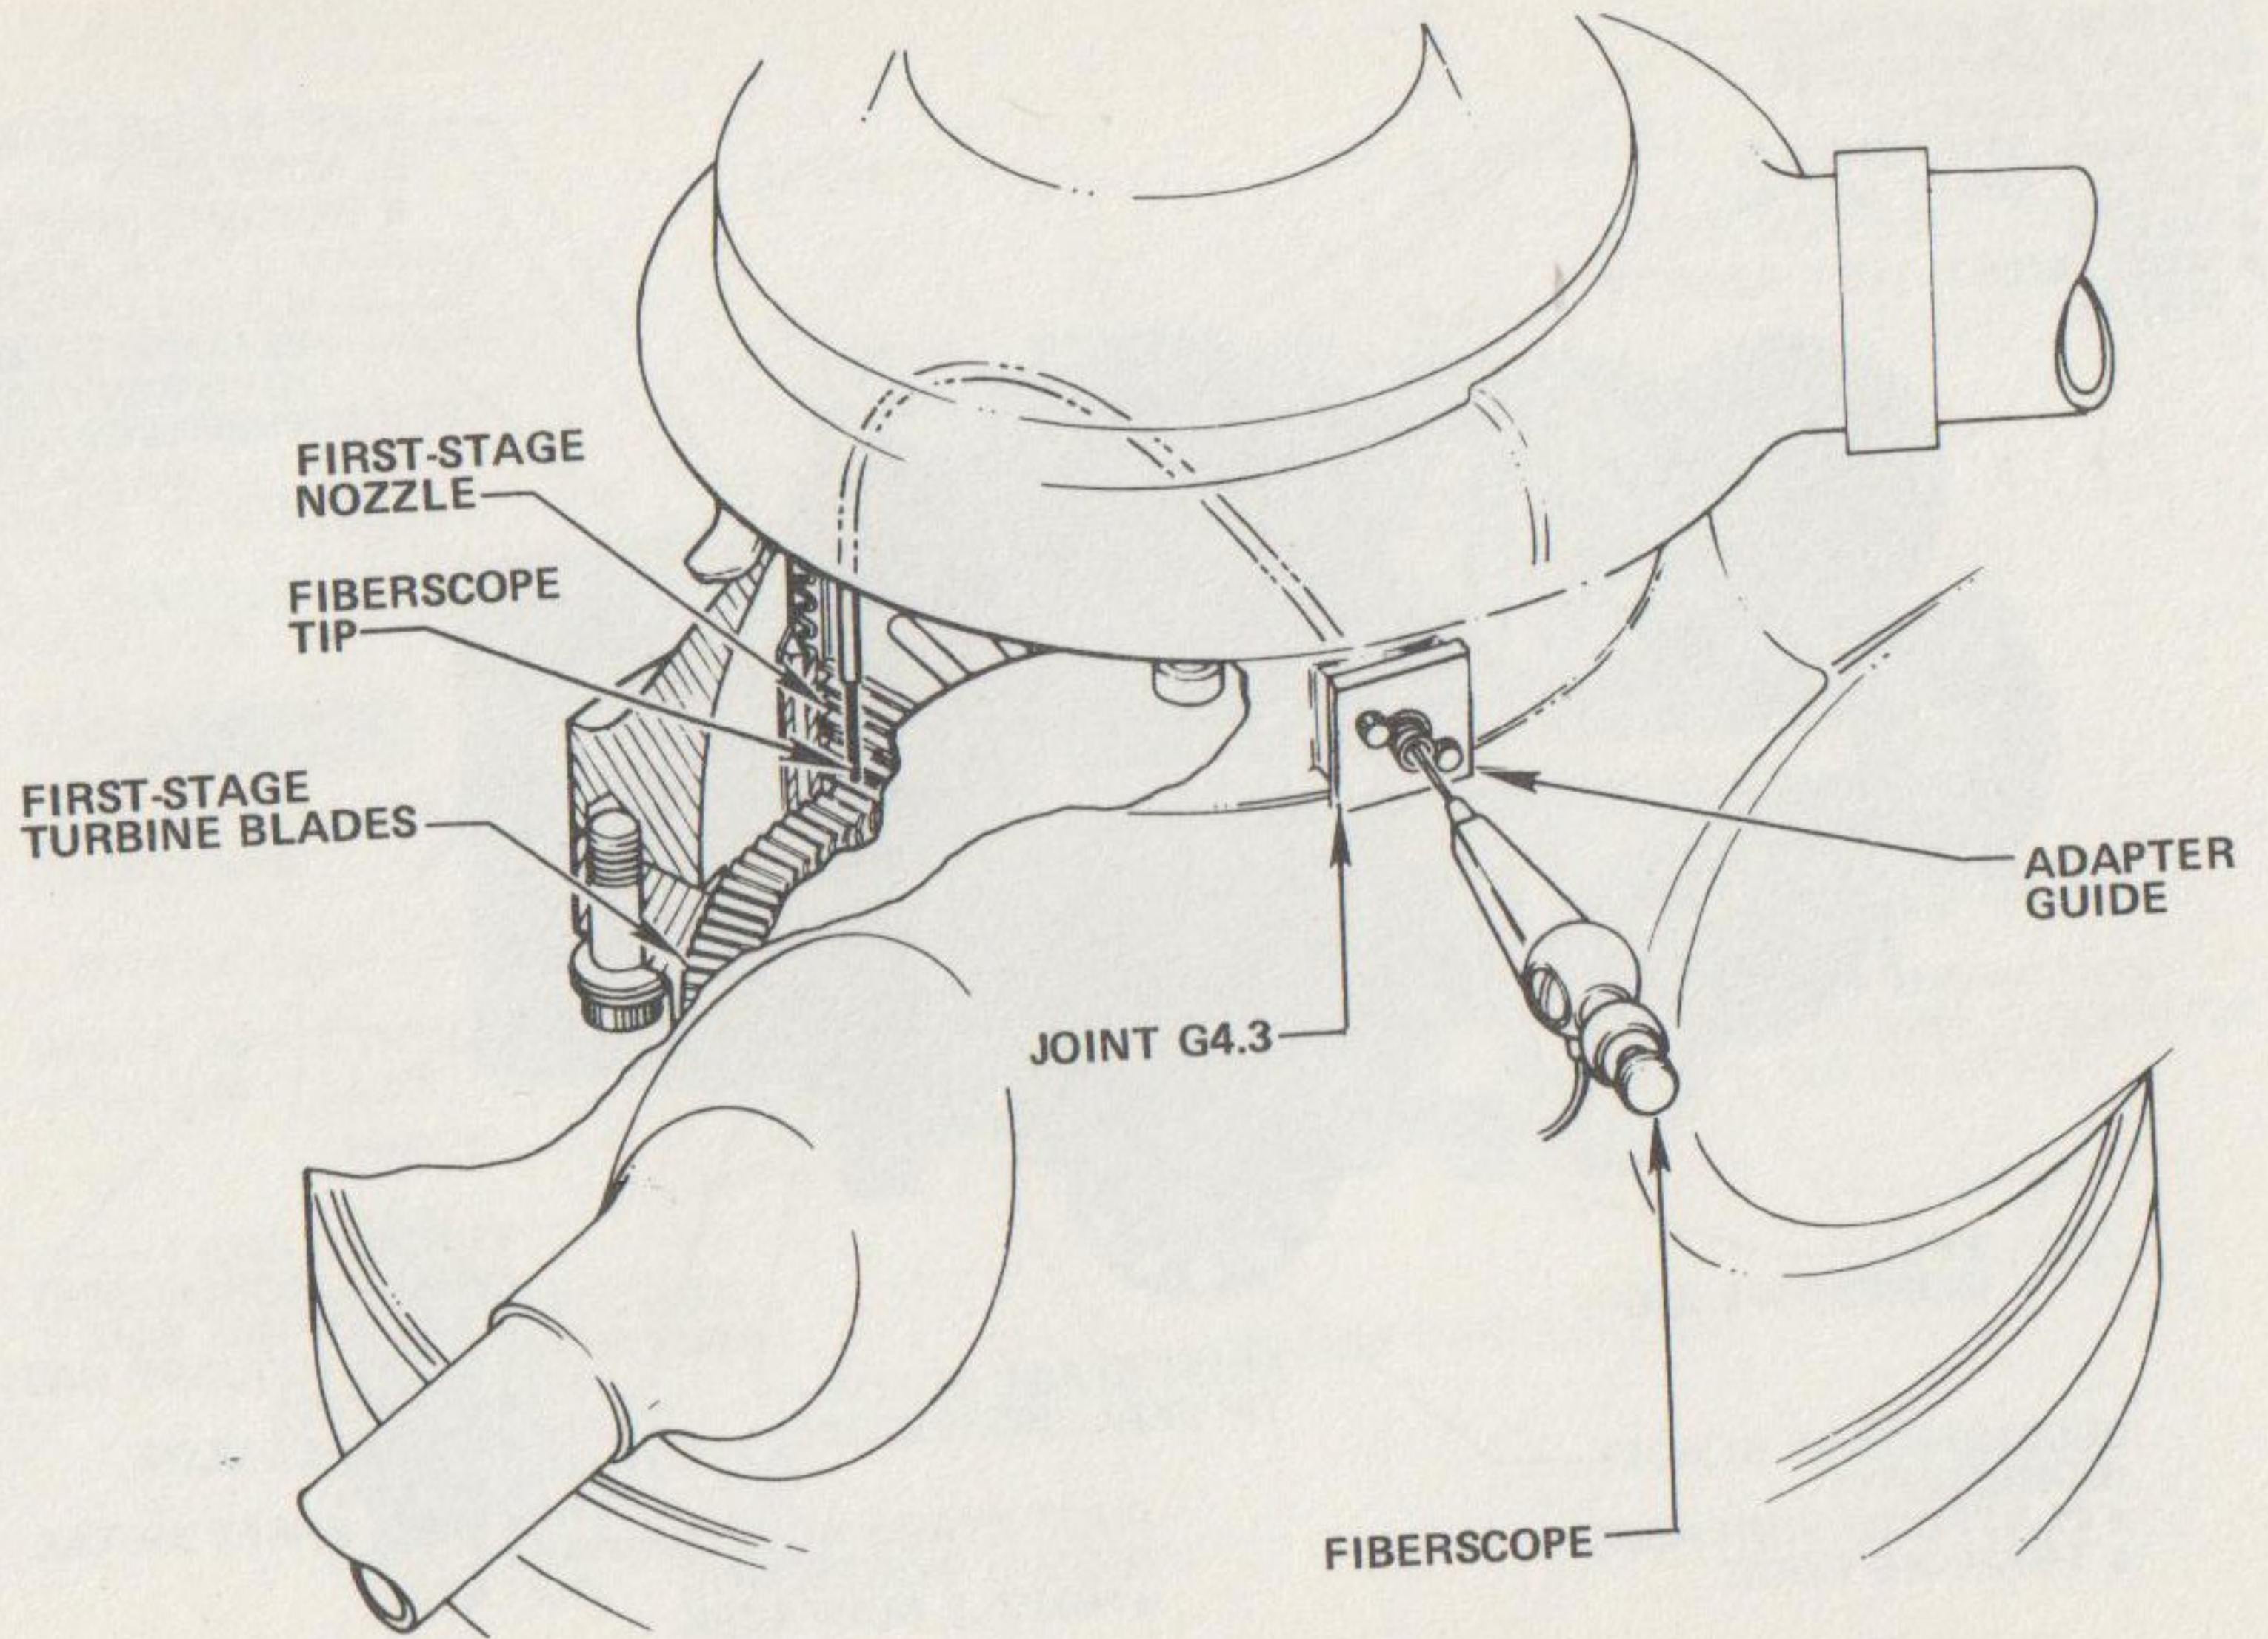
HPFTP FIRST-STAGE TURBINE BLADES/NOZZLE INSPECTION
